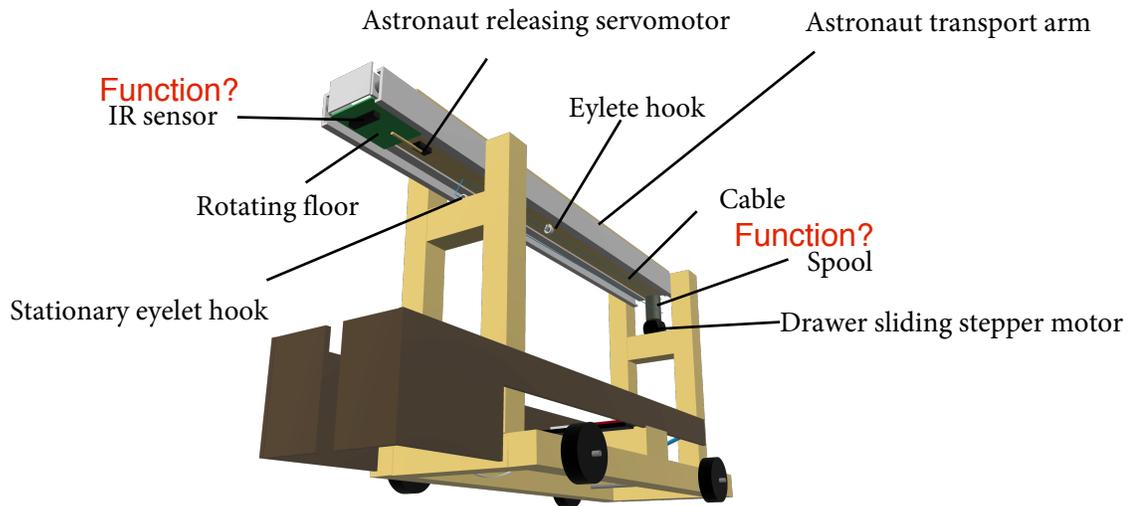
Drawer Slide-Pulley Mechanism of The E.T.
